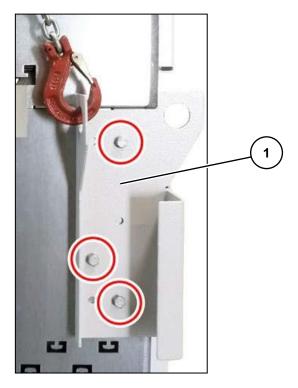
Craning angle (1) mounted at the side of the panel front (3 bolted joints), shown here with crane hooks
